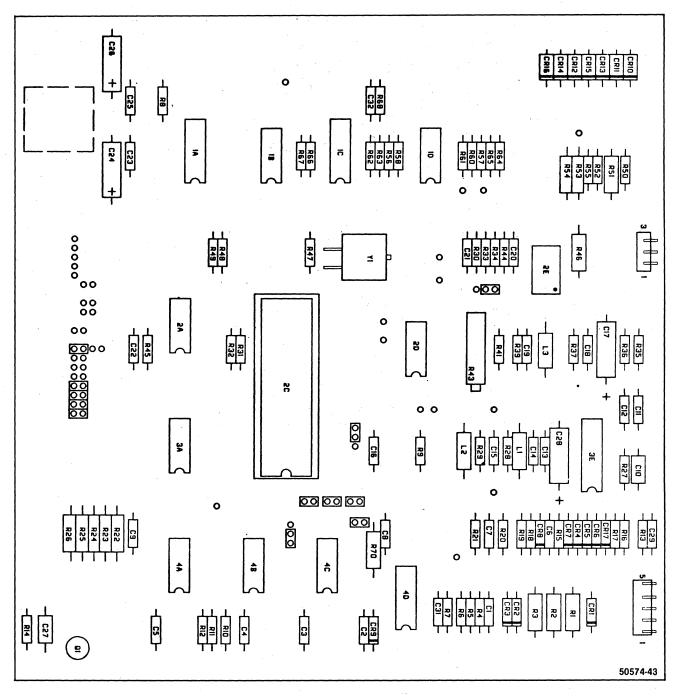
PCB COMPONENT LOCATIONS P/N 25136
